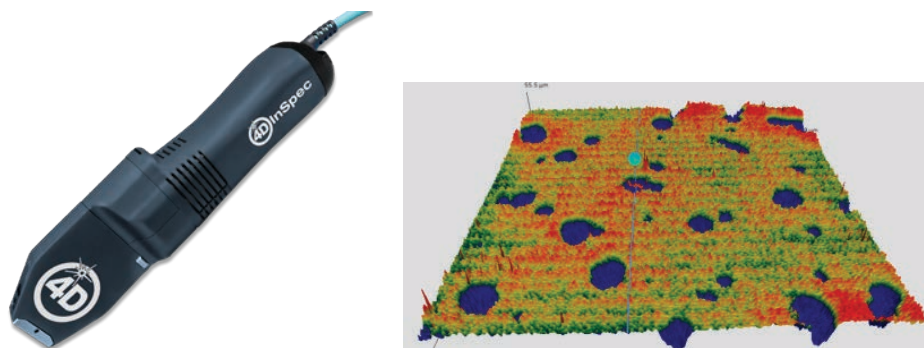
4D InSpec surface gauge (left) and a false-color 3D measurement (right) of pitting on a surface, as taken with the 4D InSpec
